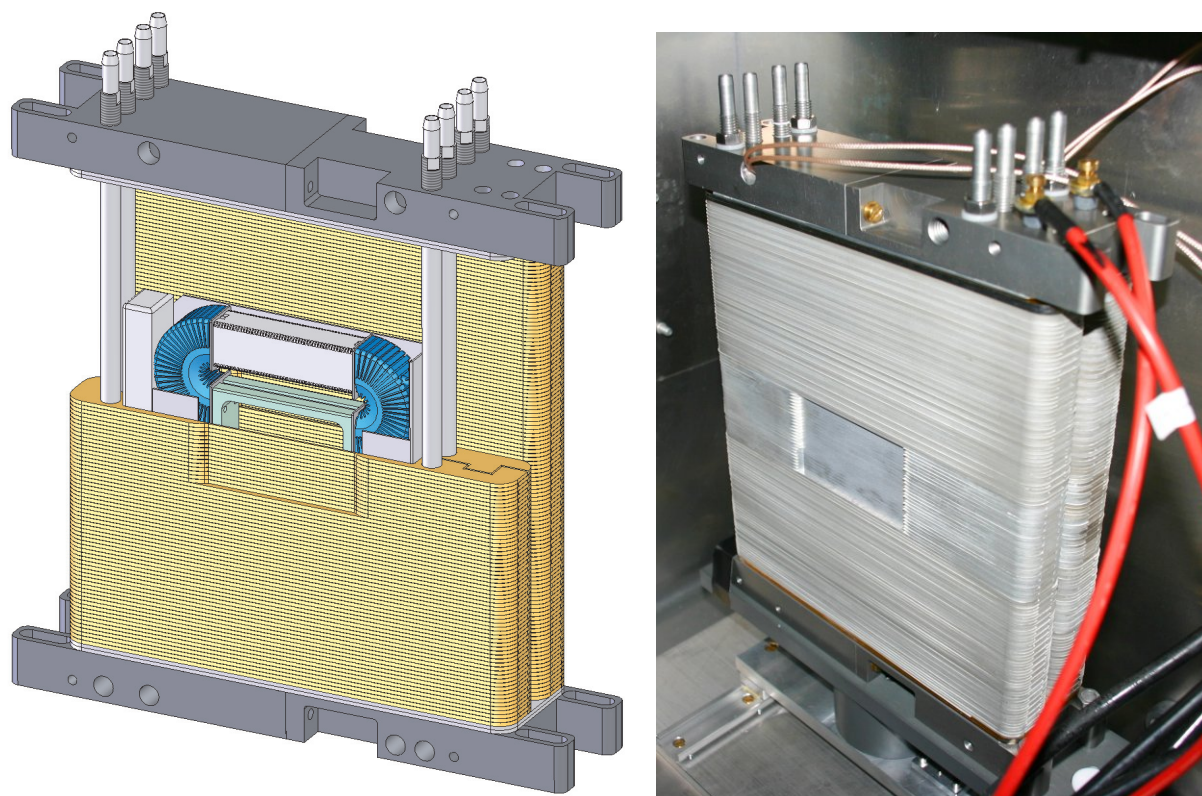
3D drawing of a bootstrap coil and its components (left). A completely assembled coil with already inserted RF coils and installed air cooling is shown on the right (the Mu-metal shield of the coil is missing).
